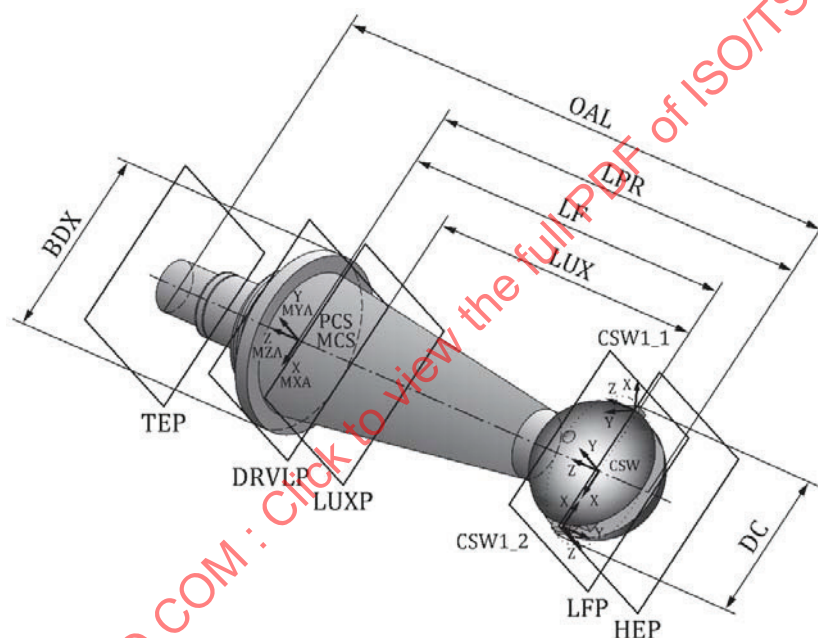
Assembled feed out tool with one swing slide for internal machining
